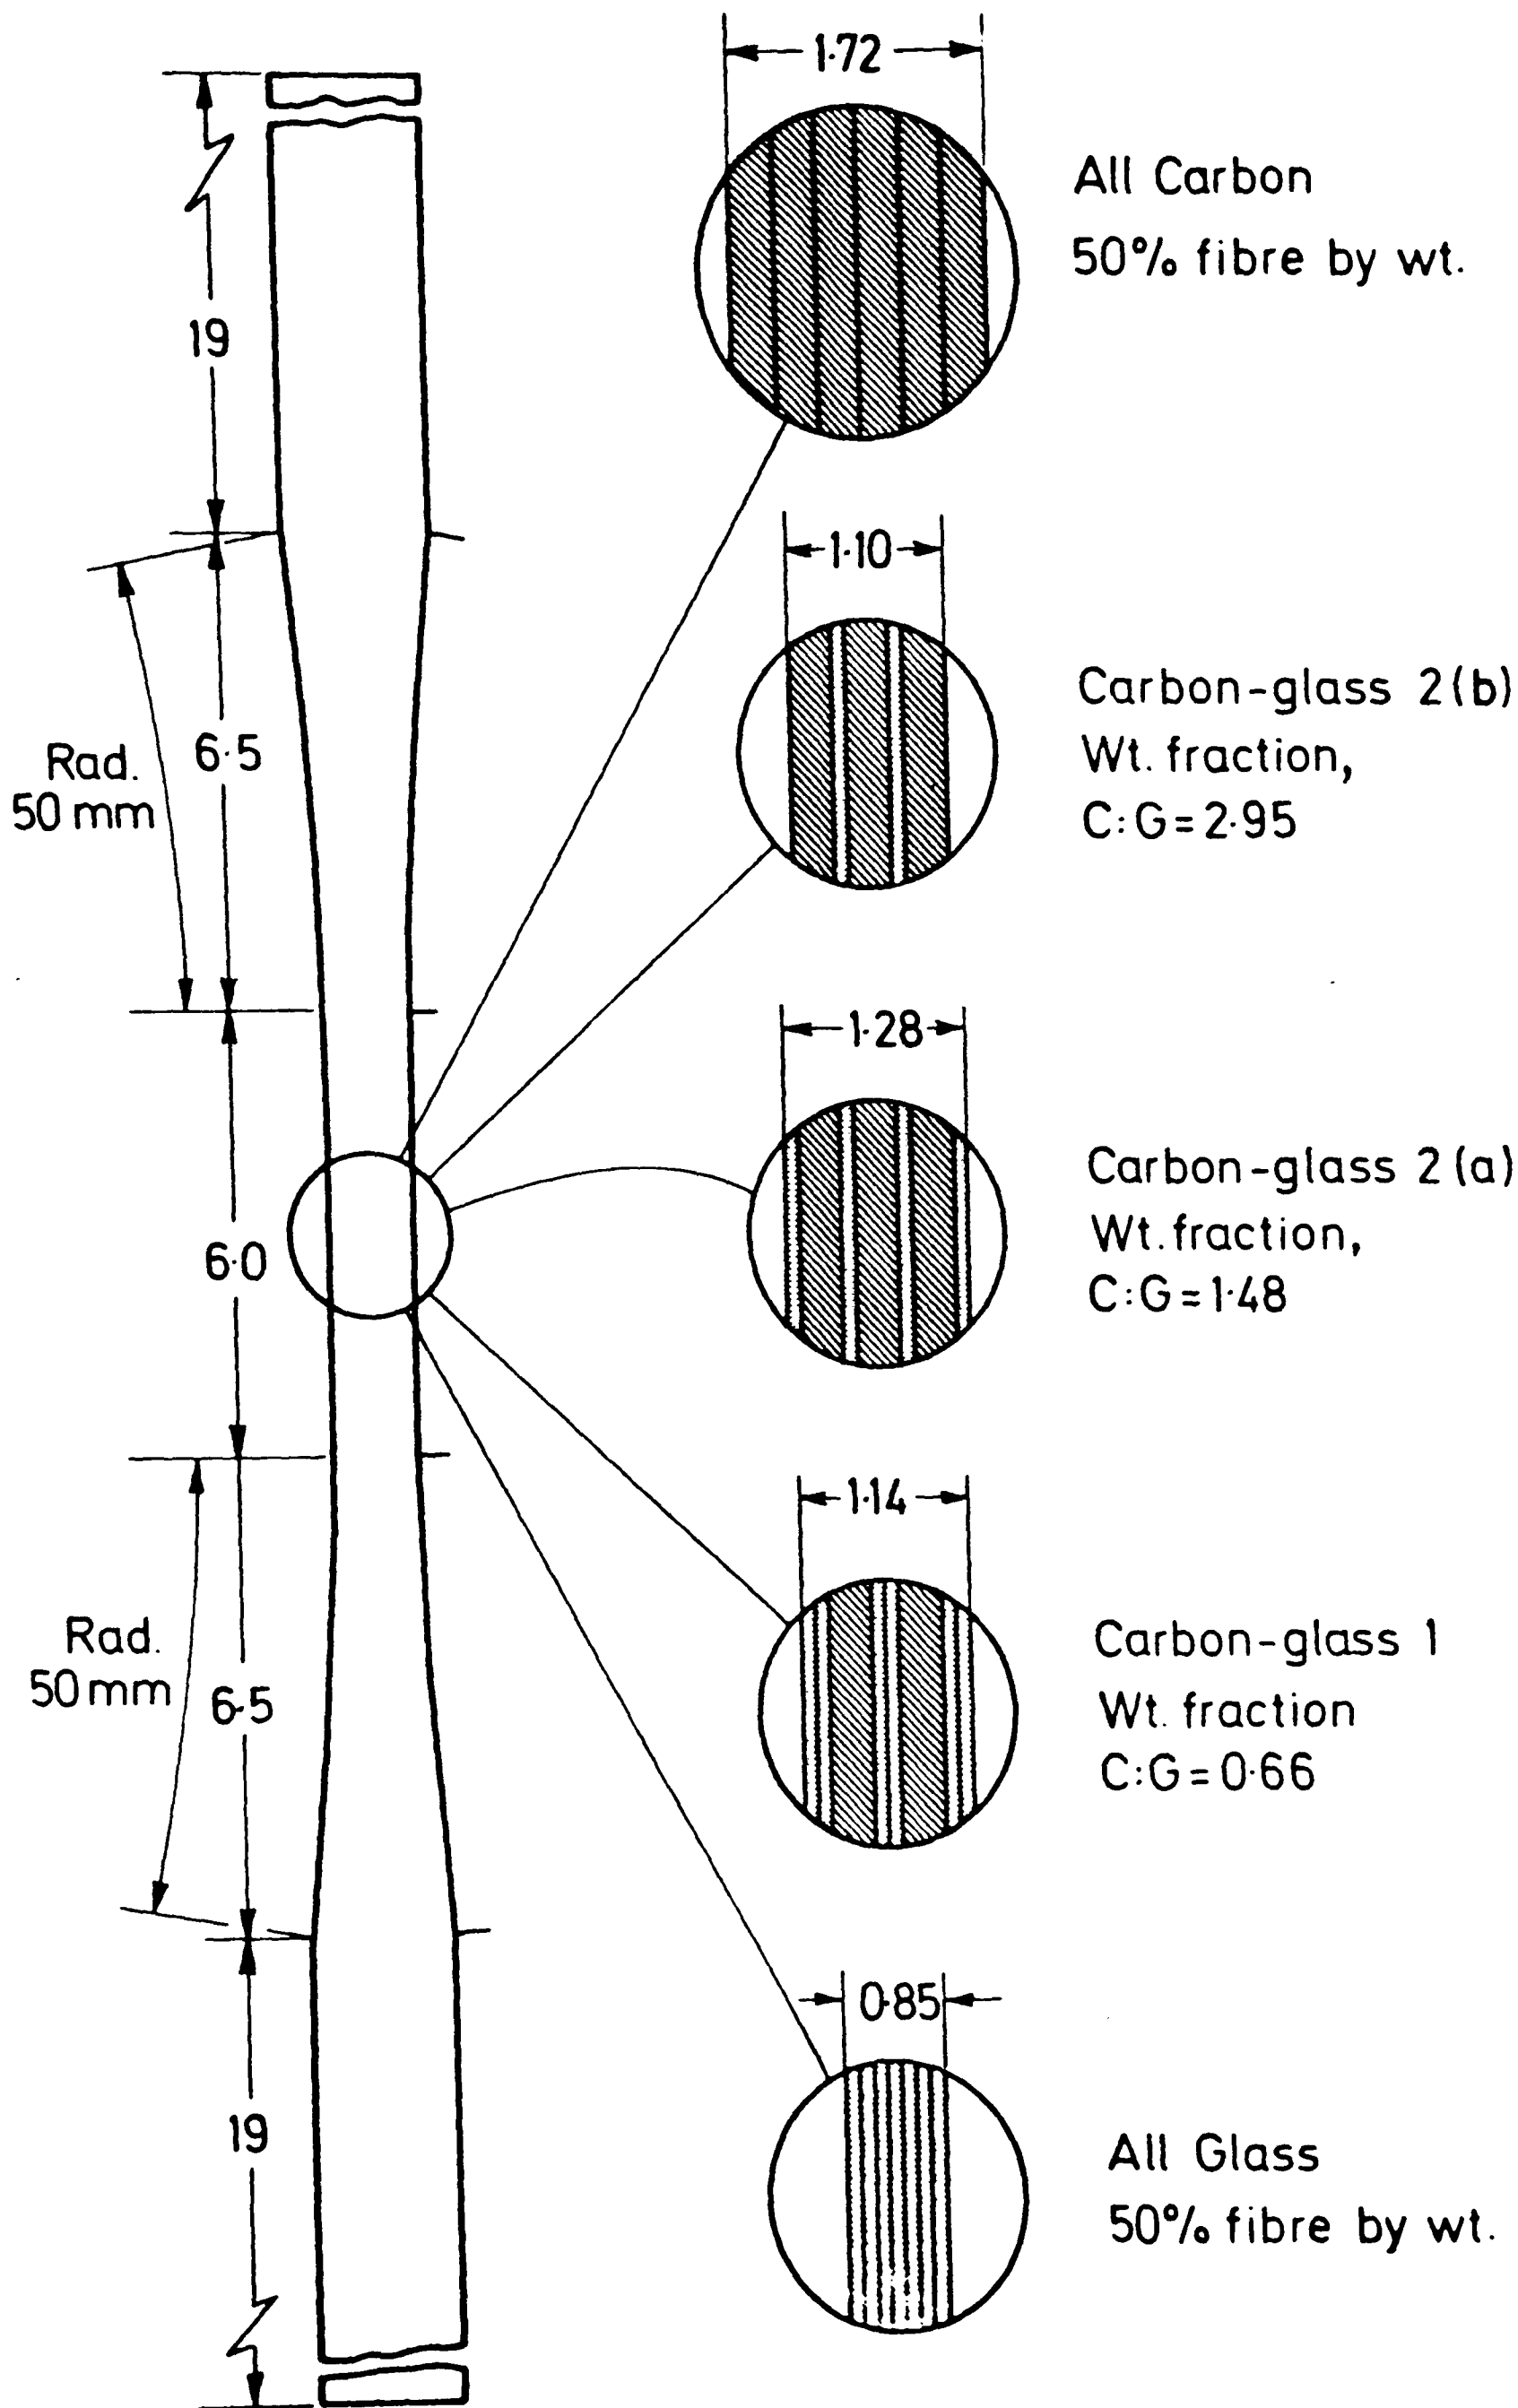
SPECIMEN DESIGN AND HYBRID LAY-UP
